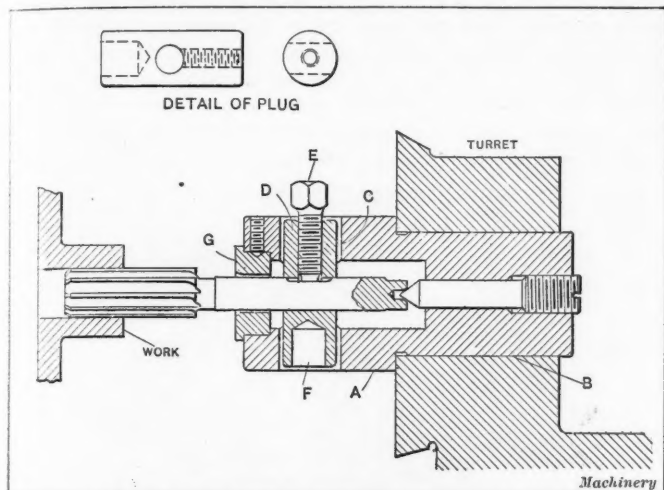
Reamer-holder adapted for Use on Small Hand Screw Machines
